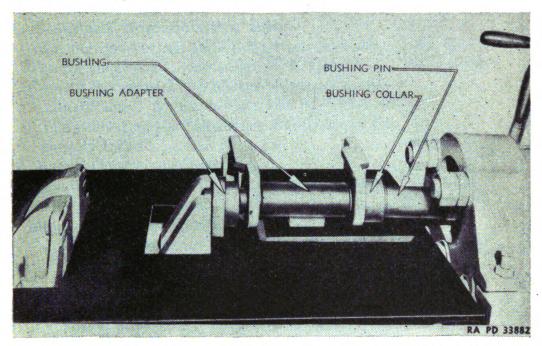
Pressing bushing in place using bushing adapter, bushing assembly pin and bushing collar.
